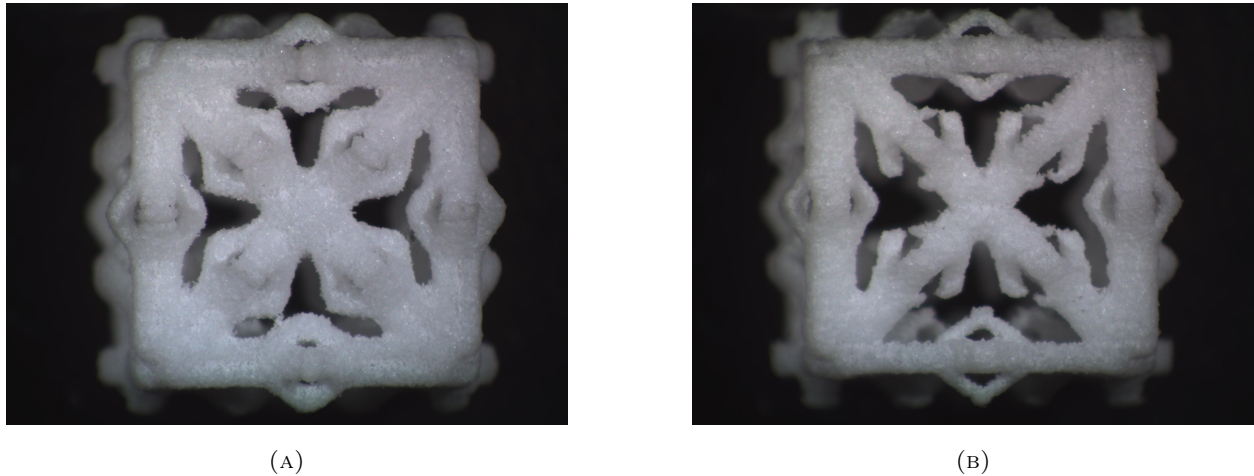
Photographs taken by stereo microscope of the unit cell consisting of square ribs with four fold plate elements corrugation (S1\_rev3). Overall dimensions were 8 mm on a side (a) Top (or bottom) surface and (b) Side surface.
